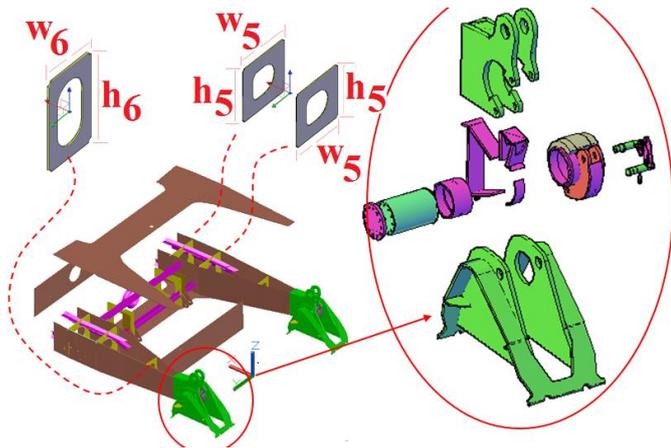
Explosive 3D illustration of the Pivot part of the designed crane structure
